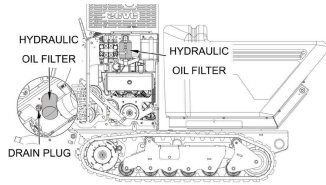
Hydraulic Oil Filters & Drain Plug
